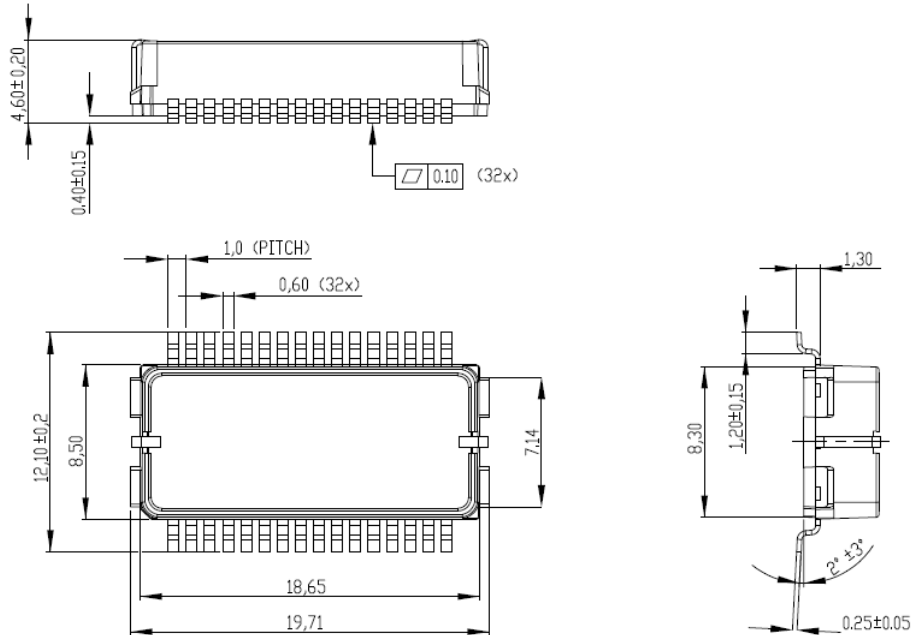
Package outline and dimensions of the SCC1300. All tolerances are according to ISO2768-f (see table below) unless otherwise specified.
